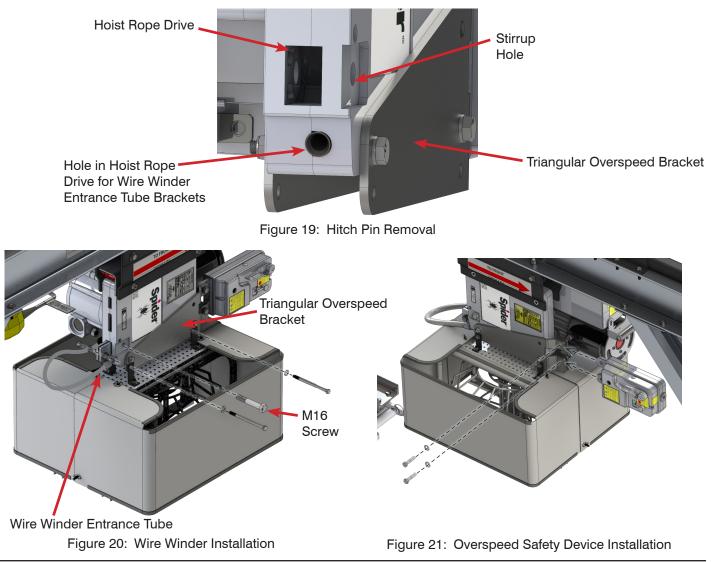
Insert the brackets for the Wire Winder Entrance Tube into the square hole in the side of the Hoist Rope Drive (see Figure 19). Insert M16 screw into Stirrup hole and secure with nut.
